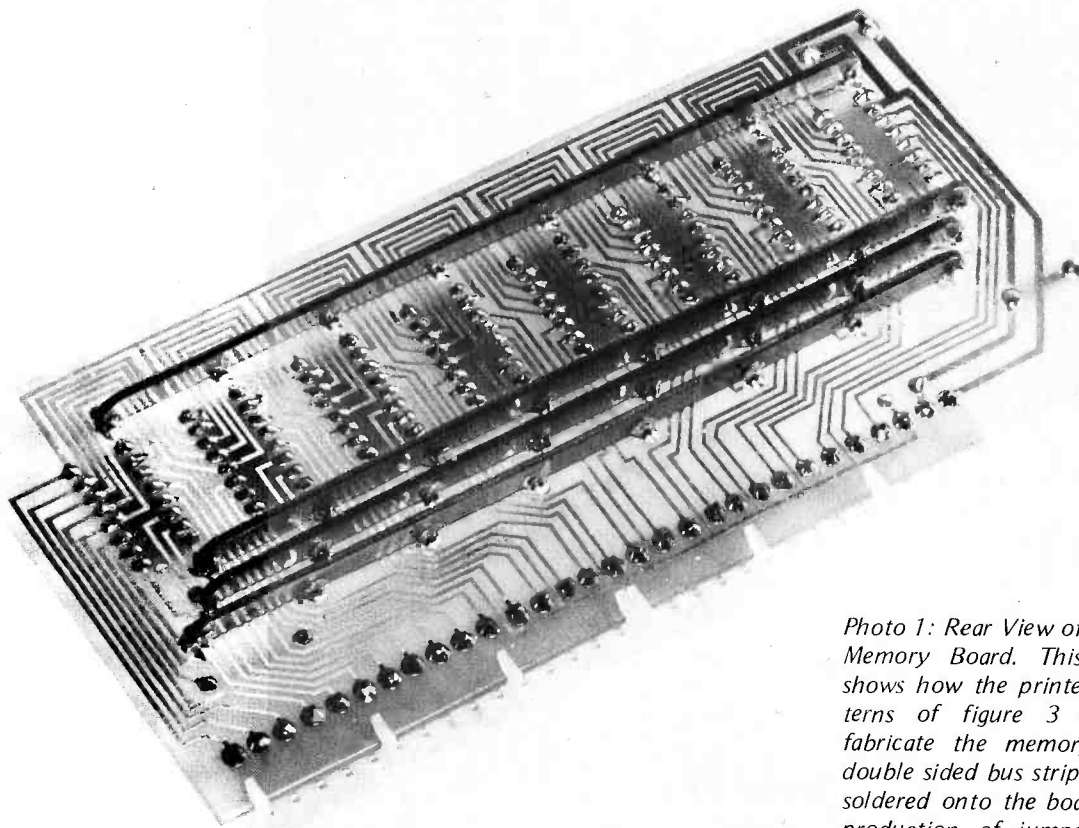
Rear View of the 1 K by 8 Memory Board. This photograph shows how the printed circuit patterns of figure 3 are used to fabricate the memory. The four double sided bus strips required are soldered onto the board. The mass production of jumpers with this method saves time and effort in construction of the board.
